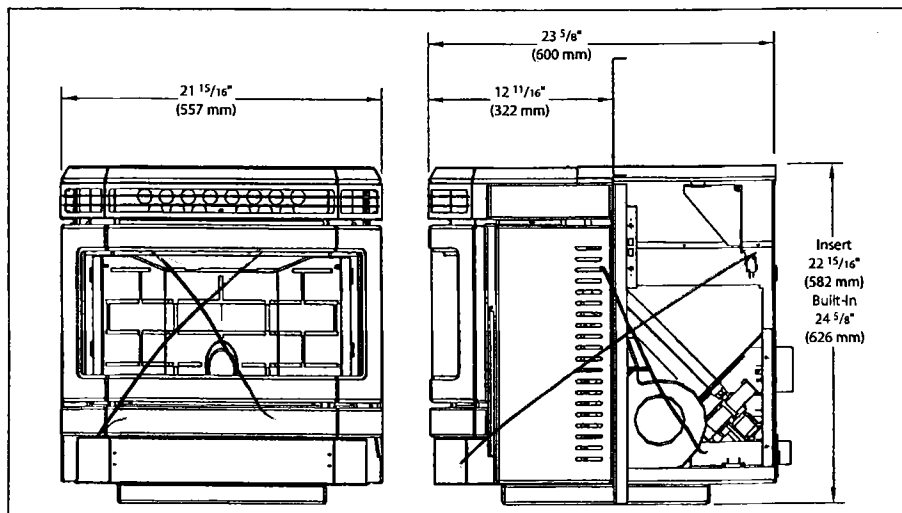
Dimensions of EF3 Bayview Fireplace Insert and Built-In Heater.
